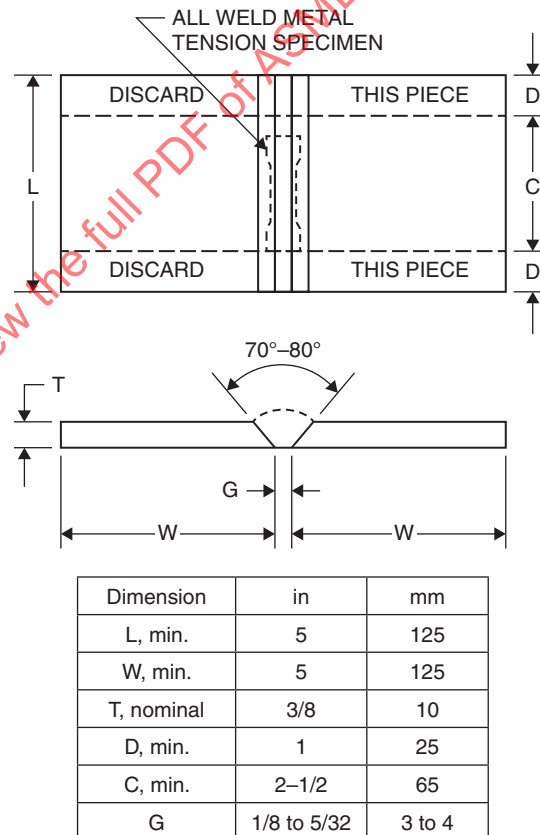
Groove Weld Test Assembly for Mechanical Properties
